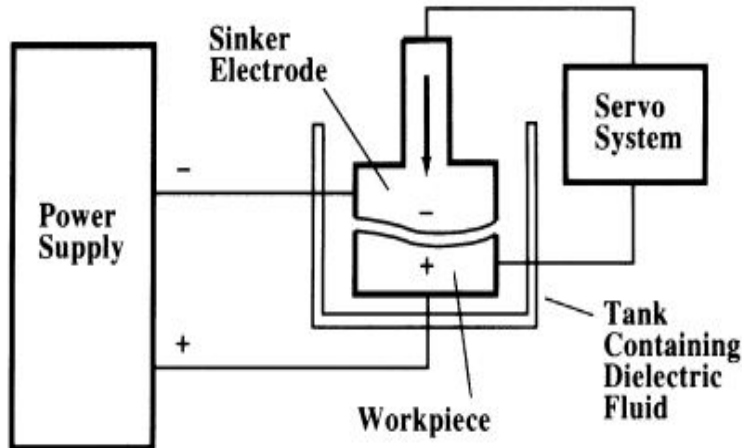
Sinker or thrust kind EDM Machines are used to drop cavity in mold and die
